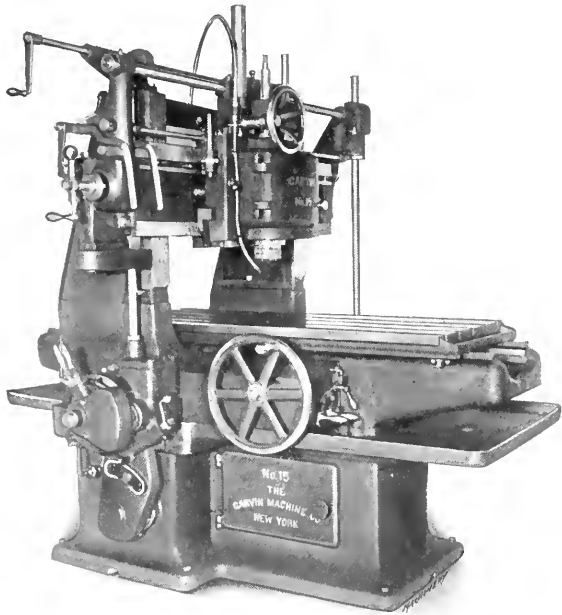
Garvin No. 15 Vertical Spindle Milling Machine
